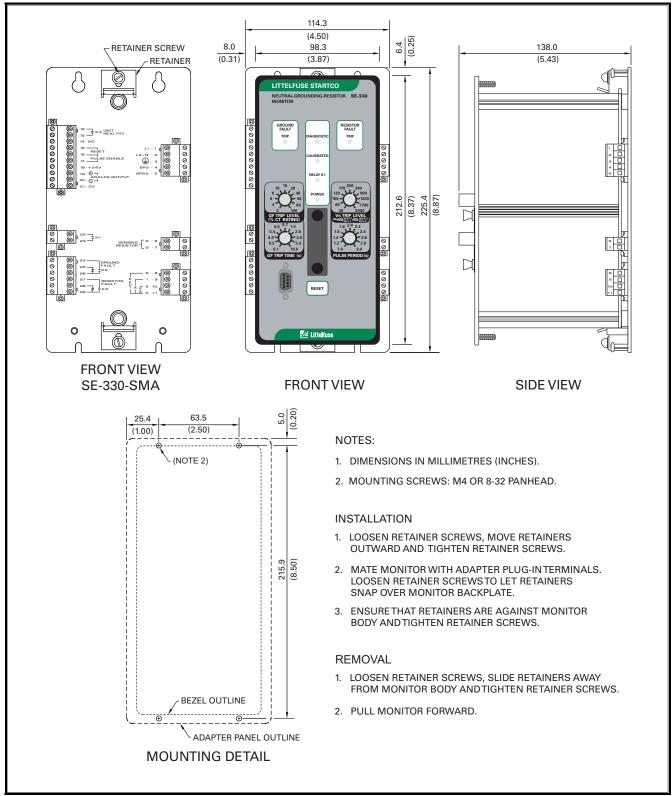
SE-330 Outline and Surface-Mounting Details.
